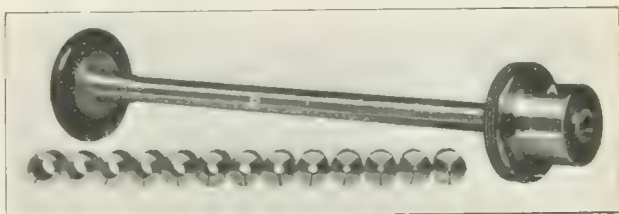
A New Draw-In Attachment and Spring Collets.
